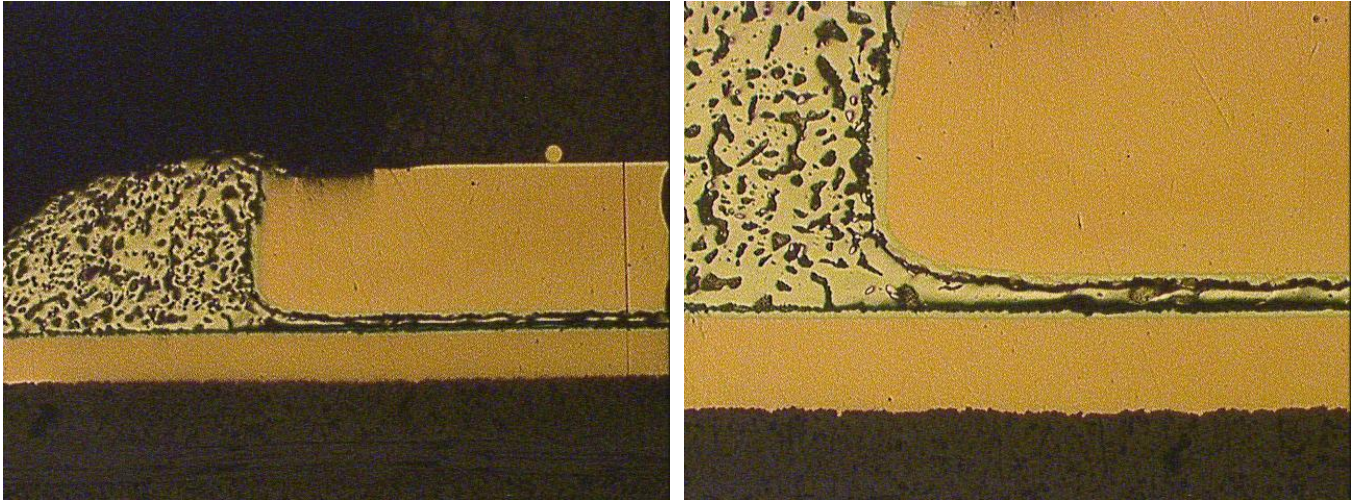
QFN-20 Solder Joints, Board 108, Component U28, SN100C/Sn, Reworked with SnPb Paste, 2 Reworks, DNF
